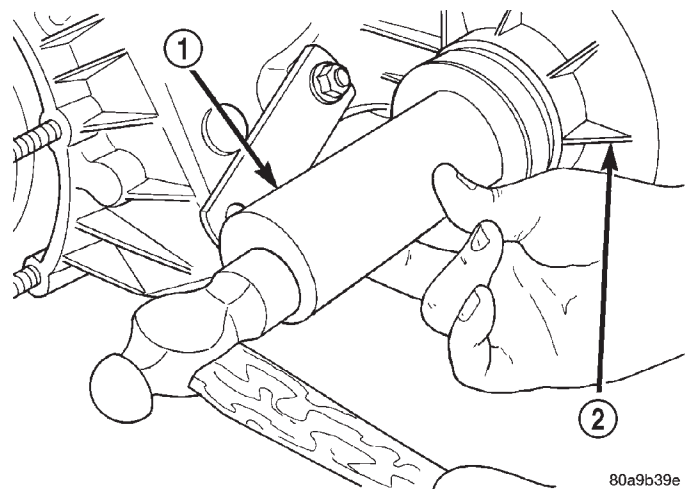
Installing Front Output Shaft Bearing Retaining Ring
